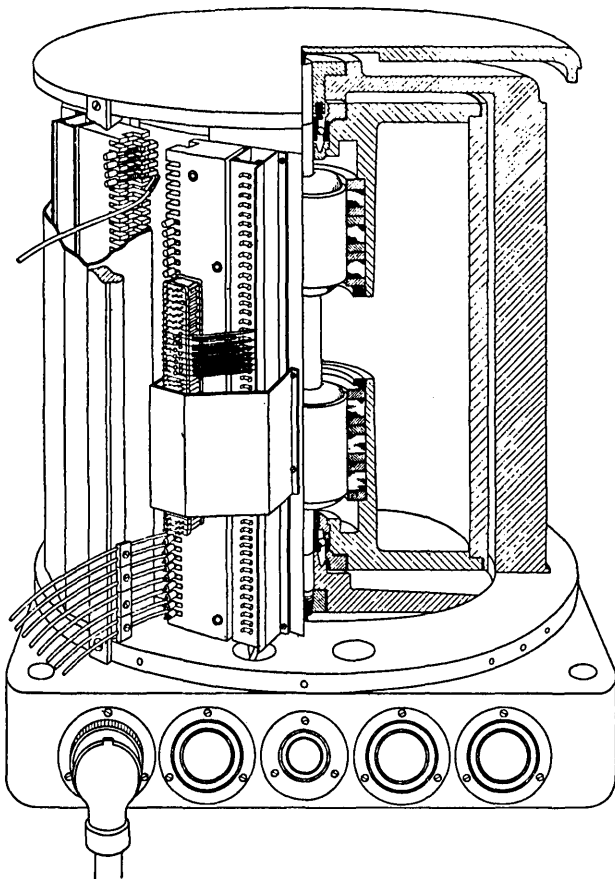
A sectioned view of the magnetic-drum store showing the mounting of the drum on the ball races and the head mounting blocks, together with the magnetic heads and the head "write" transformers.
